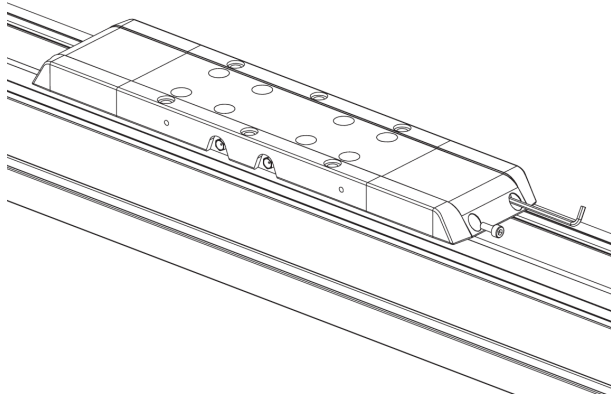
Installing the cover strip in the cover strip clamp on the HM-B
